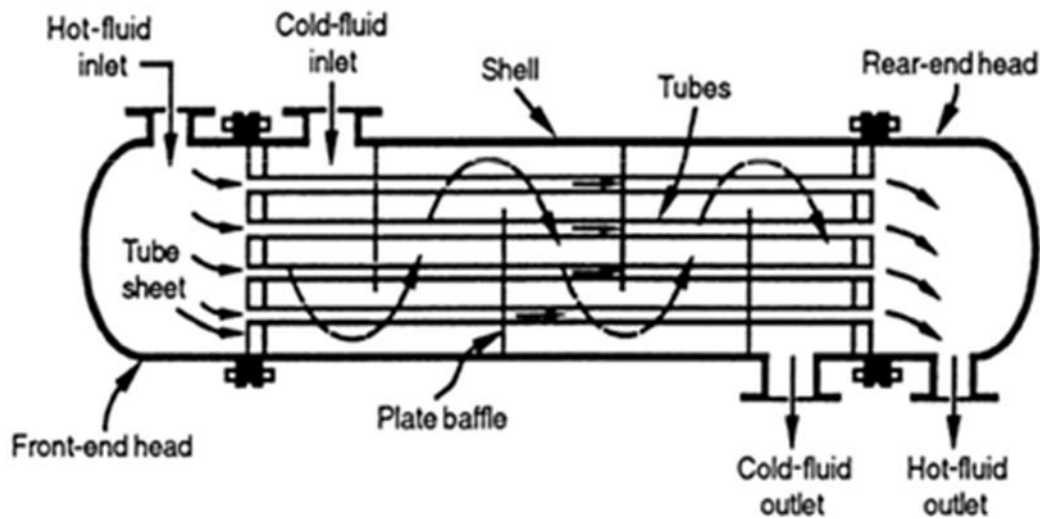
Shell-and-tube exchanger with one shell pass and one tube pass
